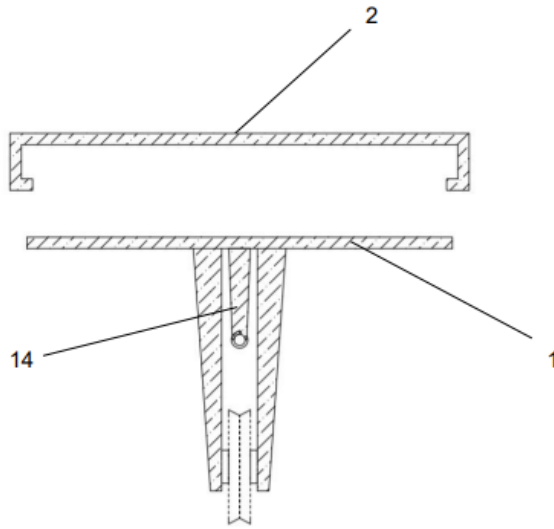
An exemplary cross-sectional view of the cover, clamp and scraper housing of the cleaning and adhesive application apparatus for optical fiber.
